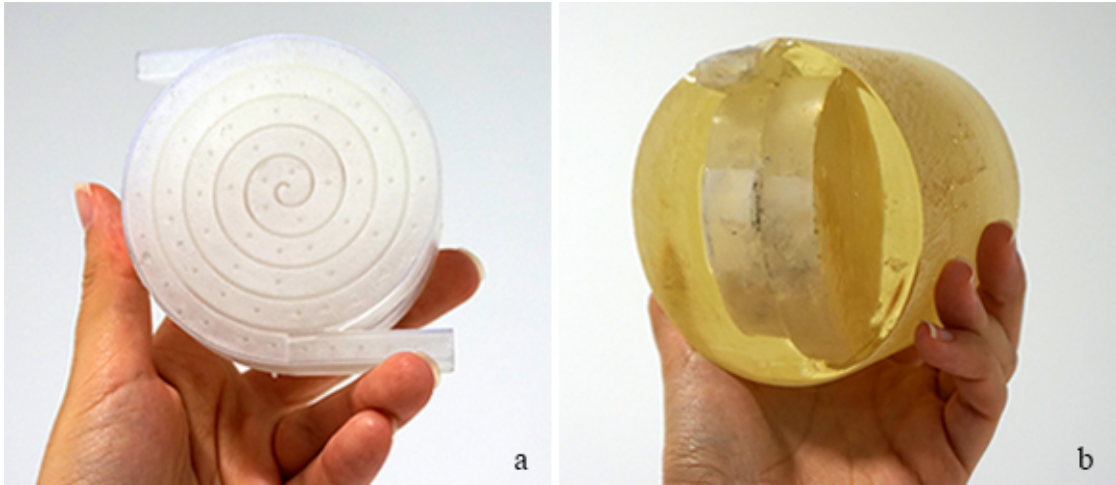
a) Inner structure of sample GR unit manufactured in the 3D printer, b) molded GR unit ready for measurement.
